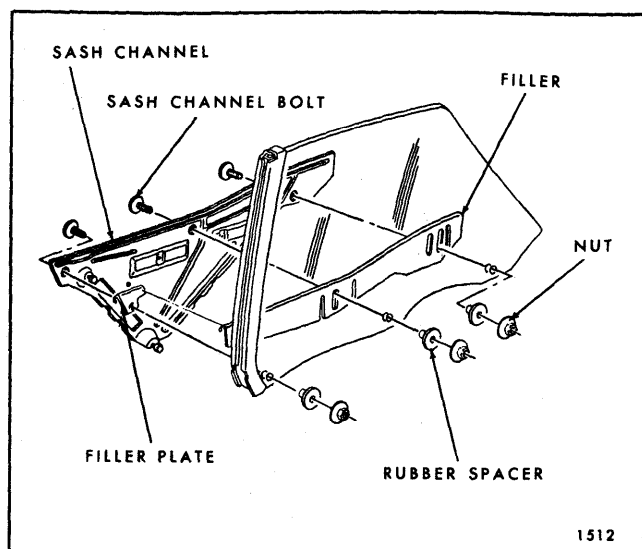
Rear Quarter Window Assembly - "B&C" - "37-57 and 67" Styles
